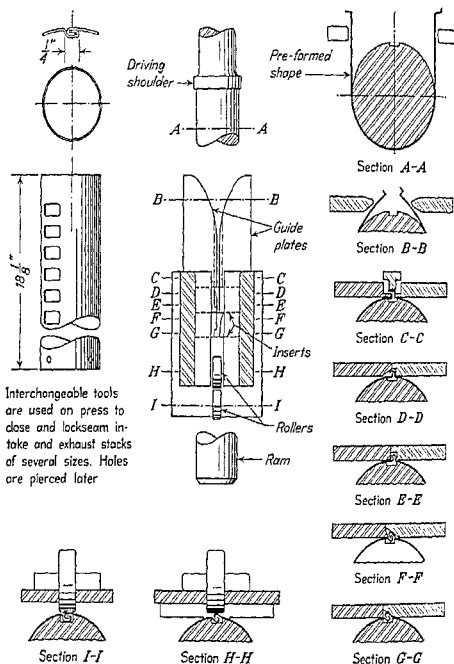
"Zipper" closing and seaming die.¹⁰
